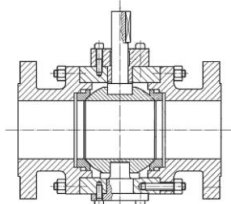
Three-piece Trunnion Mounted Ball Valve
